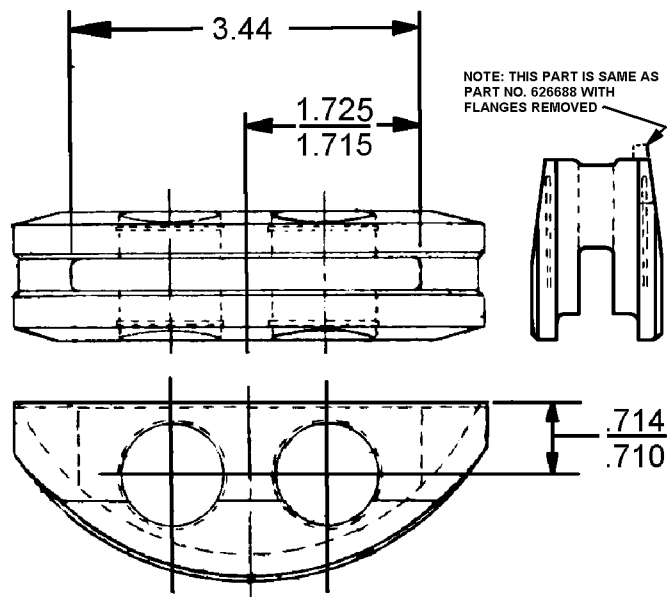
F. 639199 COUNTERWEIGHT ASSEMBLY MADE WITH 629693 COUNTERWEIGHT AND 639198 BUSHINGS
